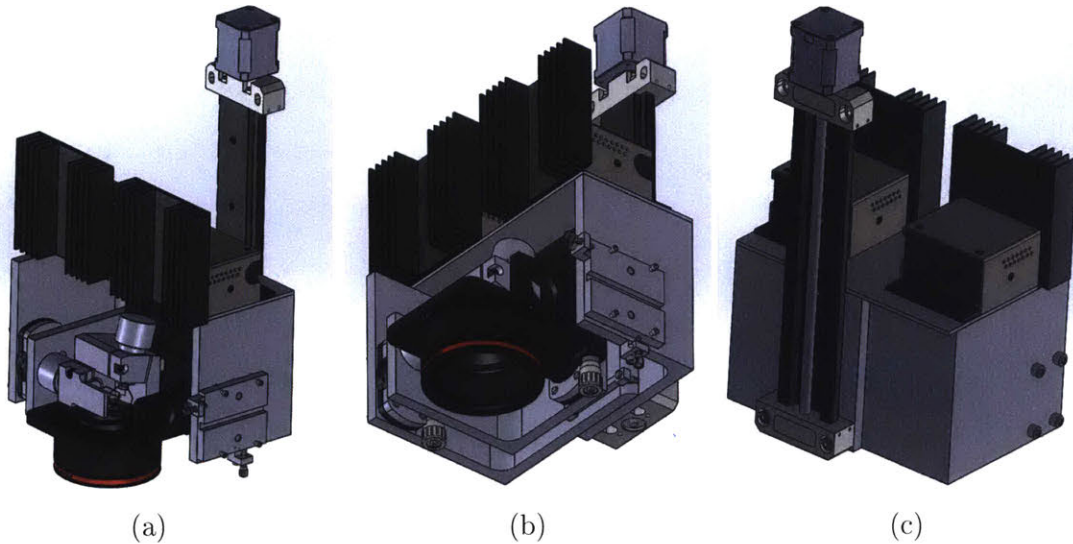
Model of optical head assembly, optical pipeline removed for clarity.
